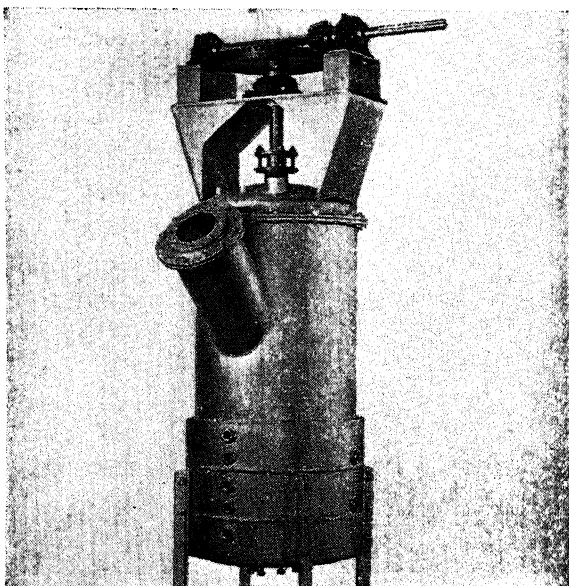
Welded stainless steel mixer for vegetable oils. Outer jacket is made of steel.
